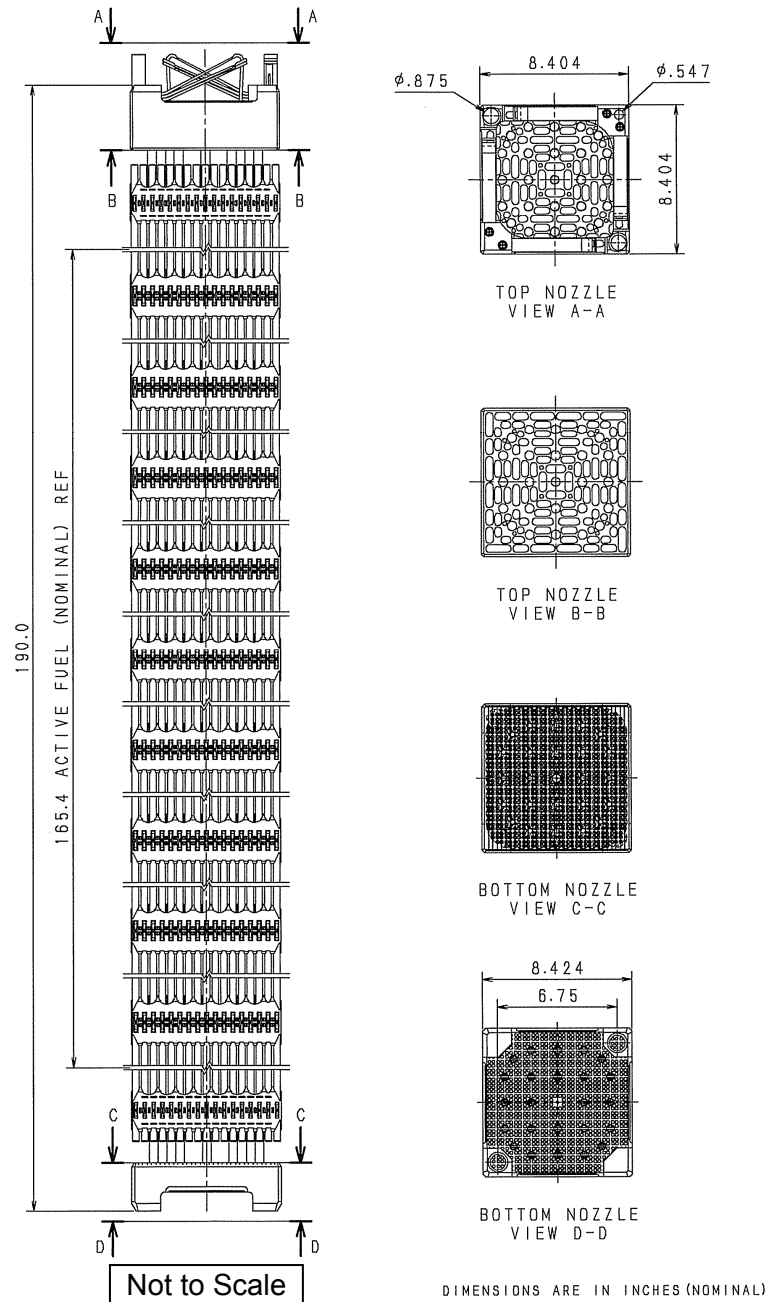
Schematic View of US-APWR Fuel Assembly
